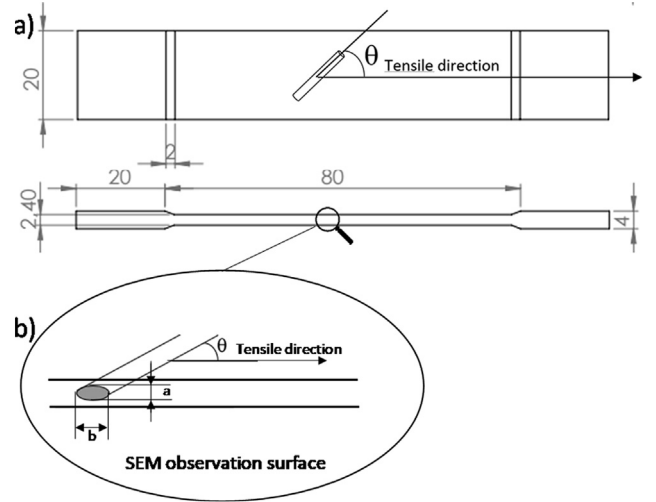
(a) Specimen dimensions for tensile and fatigue tests, (b) Elliptic form of fiber appearing at surface.
